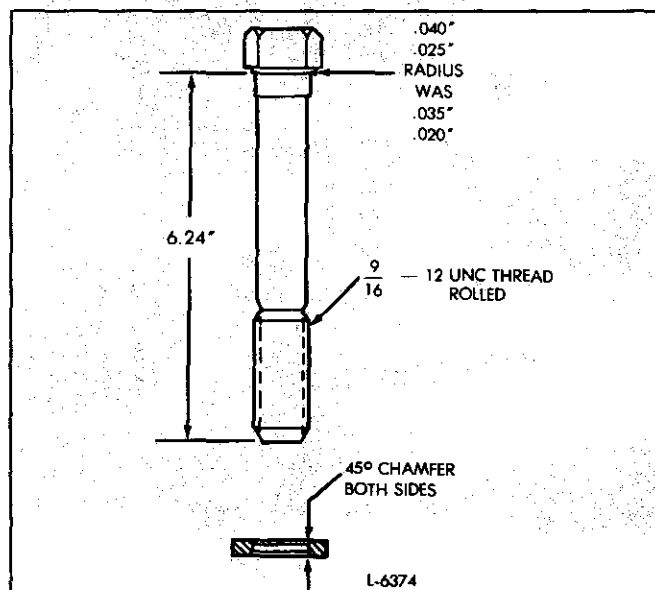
Modified 6V Main Bearing Cap Bolt and Washer
